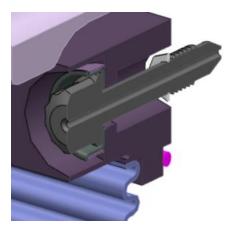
RH compatible bolt. The hole in the purple flange is threaded, thus making the bolt captive. This style is used at the inner seal flange
